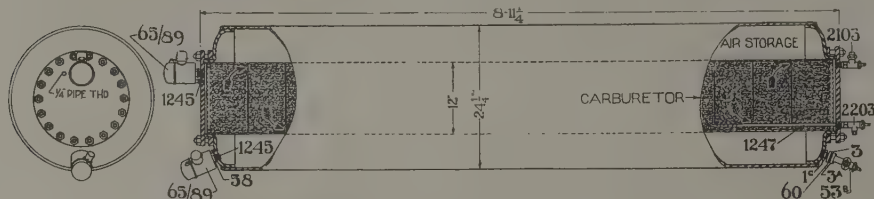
Section Through Vapor Lighting Carburetor and Air Tank.
